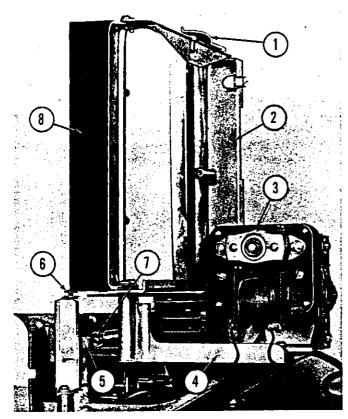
PROGRAM HOLDER, PAGE ASSEMBLY, L.H.
